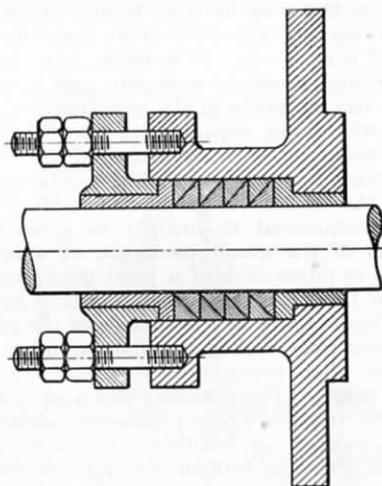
METALLIC PACKING FOR PISTON RODS.
